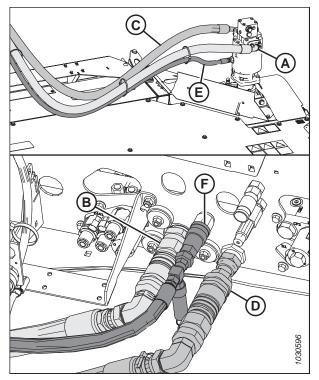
Hydraulics and Electrical – Rotary Disc Configuration with Quick Couplers Installed
